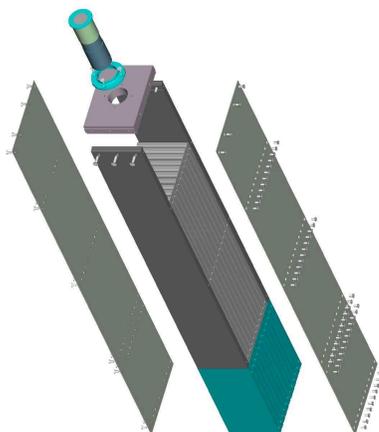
Exploded view of ATLAS ZDC module with fibers and PMT removed.
